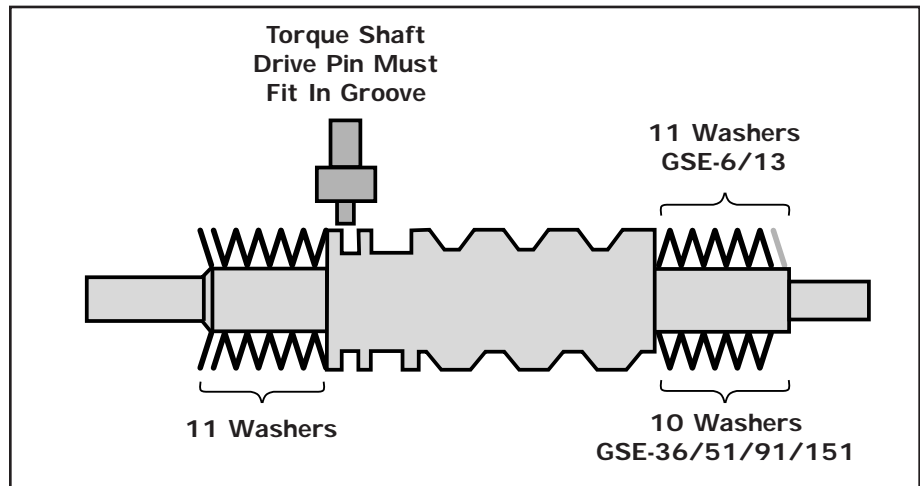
Gear Train Removal - GSE-36/51/91/151
